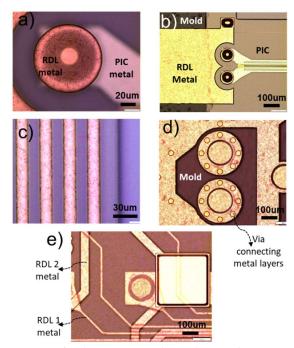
Images of package RDL processing a) via connecting PIC metal to package RDL metal. b) Metal connecting PIC to the fanout area. c) Package metal interconnects with line/space of 15um/15um d) high-speed metal interconnects from modulators on mold area. e) image showing RDL 1 and RDL 2 metal.
